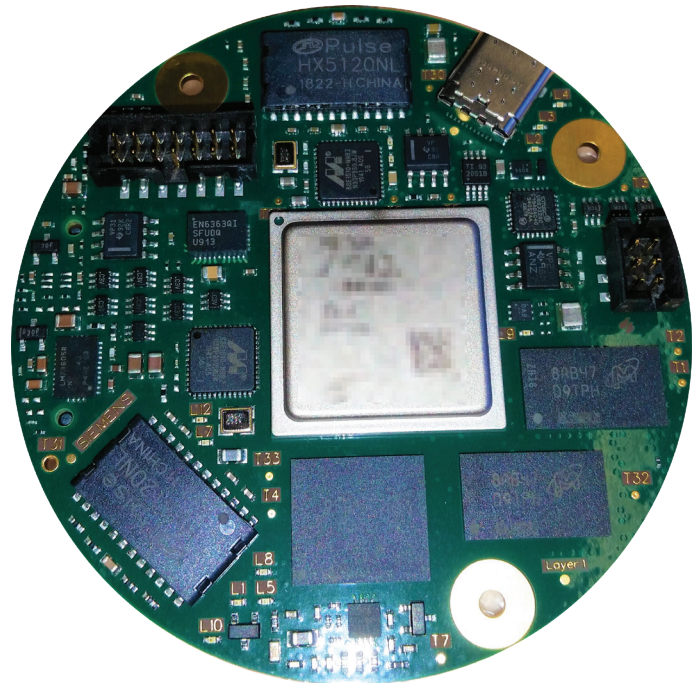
Assembled control PCB – view on top side (Design: T Lab Munich).
